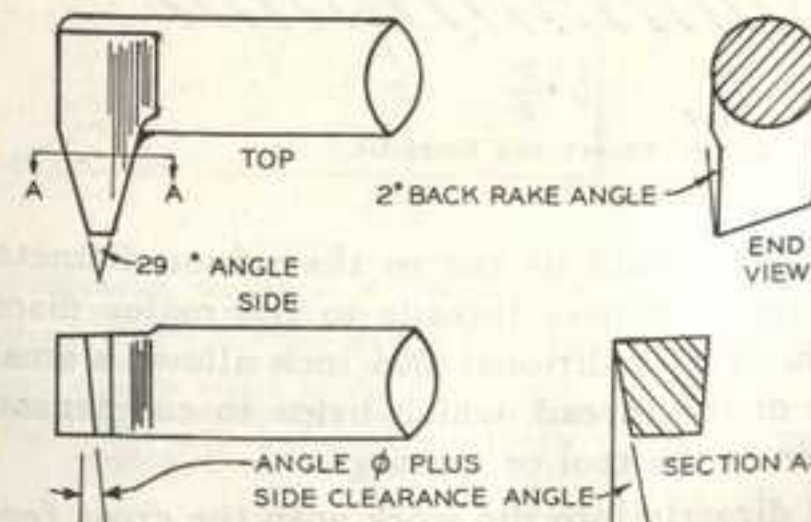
Tool bit formed for cutting an external Acme thread. To determine angle ϕ , refer to Figure 40, page 25.
